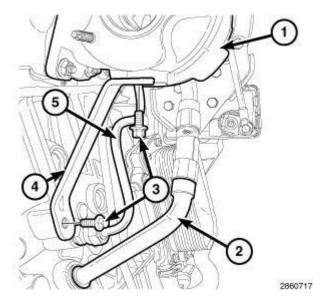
Exhaust Manifold, Turbocharger, Gasket & Fasteners Courtesy of CHRYSLER LLC
